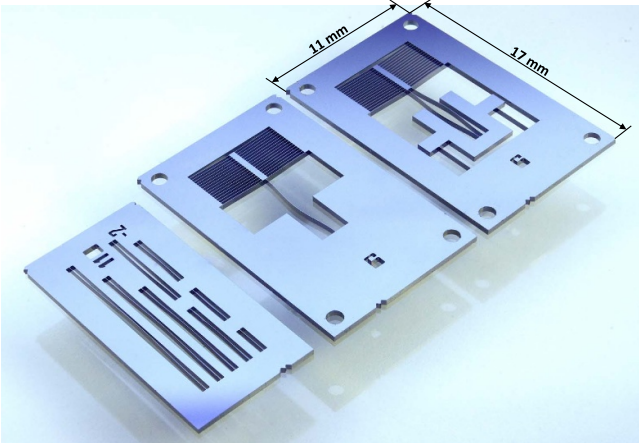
Photograph of the three different types of manufactured oxidized silicon mechanisms. From left to right: set of simple buckled beams (SBB); a buckled beam ($L = 6$ mm) preloaded by a chevron (PBB), flexure linear stage with buckled beams ($L = 6$ mm) preloaded by a chevron (PLS).
